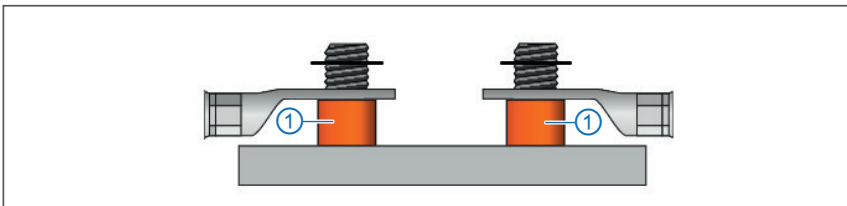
HV BM 1.2+S, placing the ring terminals of the power cables HV+ on the threaded bolts
